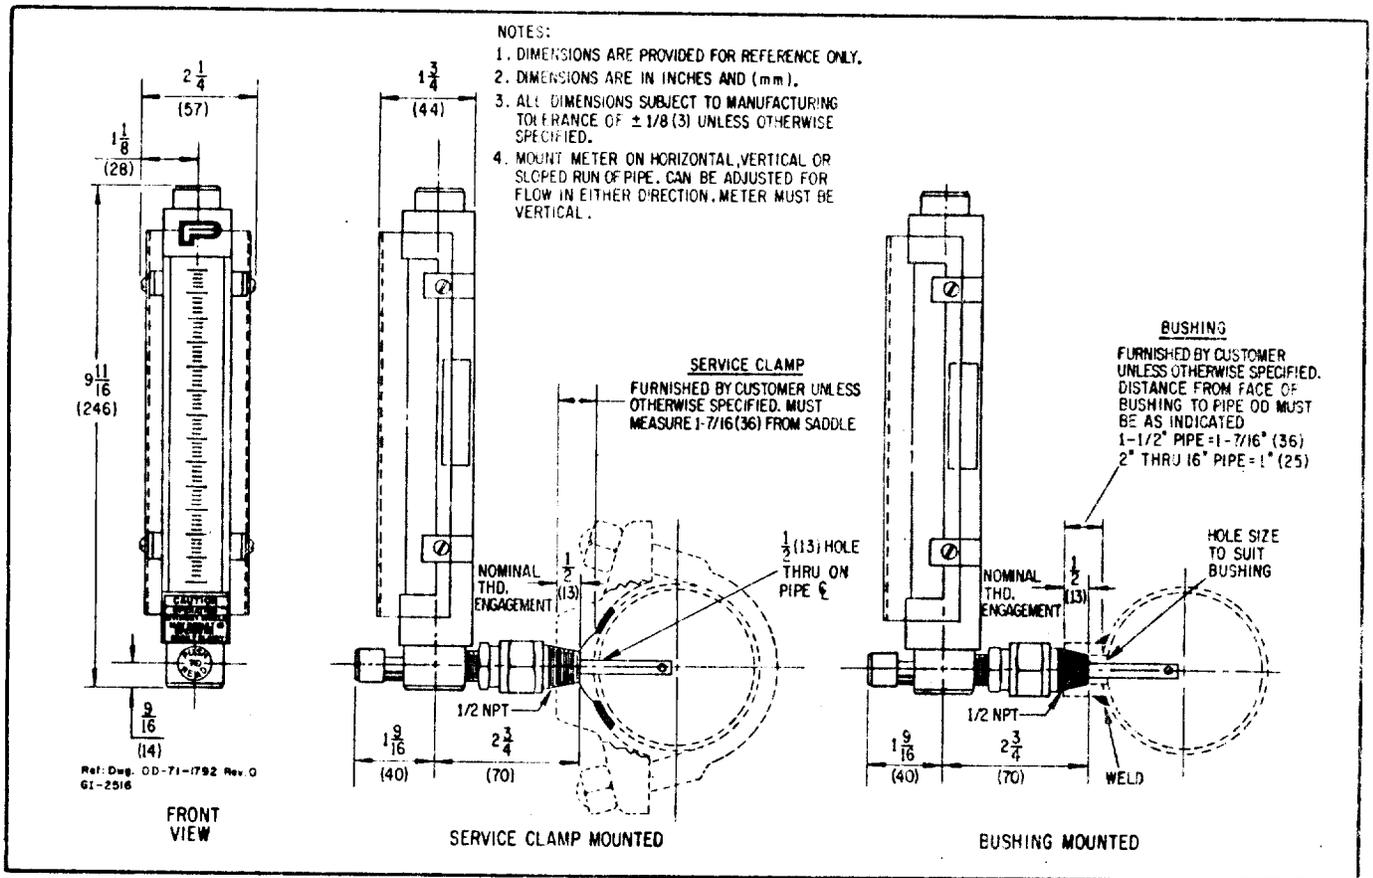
OUTLINE AND MOUNTING DIMENSIONS
